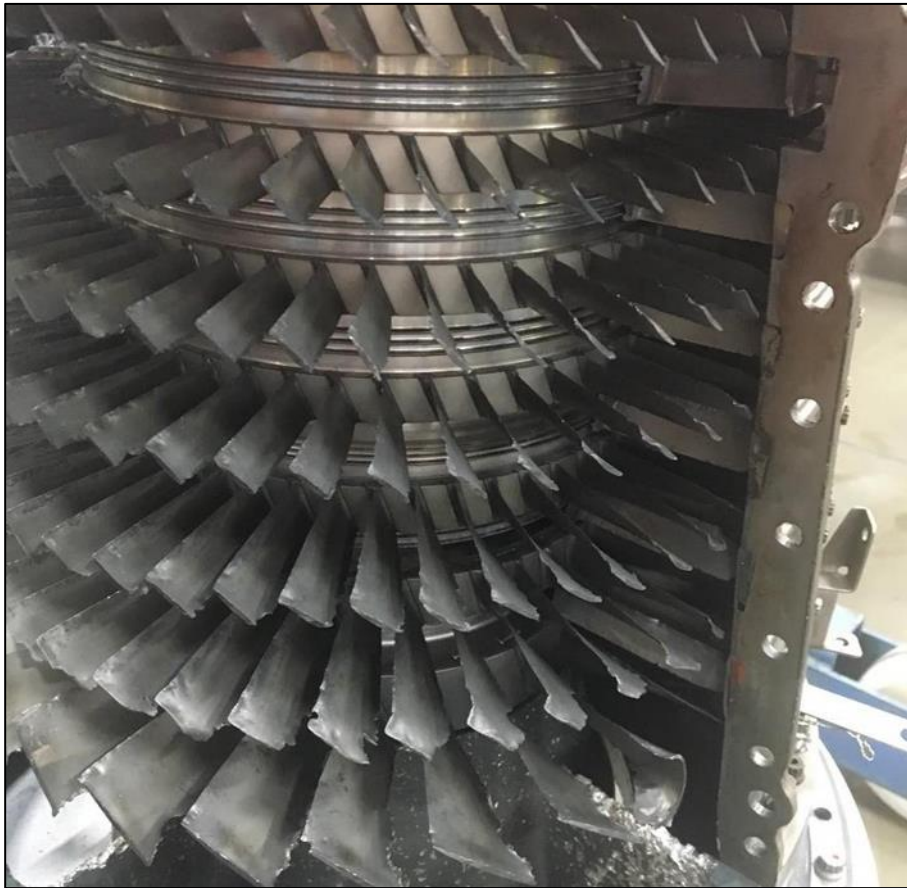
Impact damage to the compressor rotor blades. (Source: Standard Aero)
